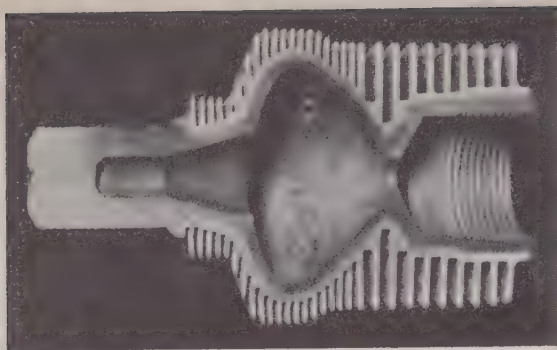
Experimental precombustion chamber shown has a somewhat more intricate shape than the part in fig. 1, but was formed by identical processes.
